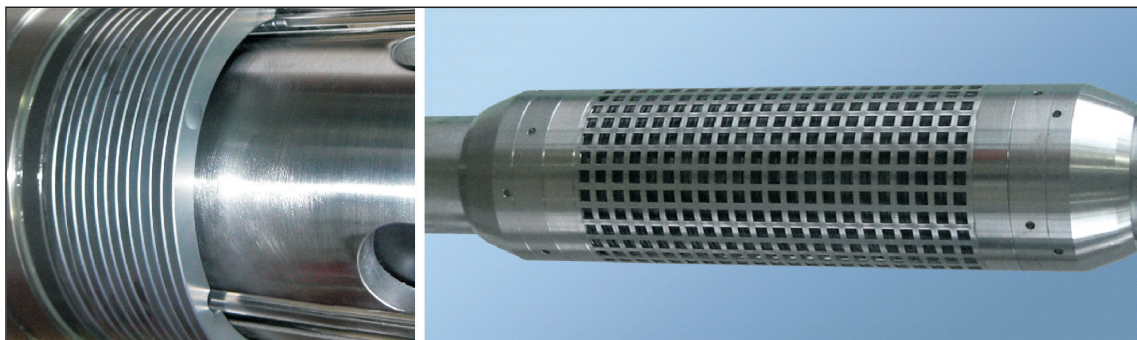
Ceramic screen mounted on 3.5" sliding sleeve, a) during assembly and b) prototype covered by protective shroud
